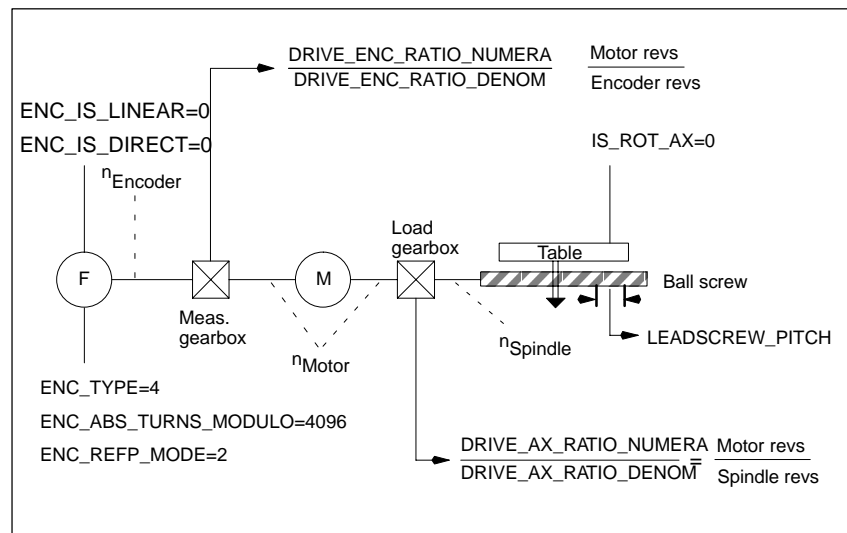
Linear axis with motor-mounted rotary absolute encoder
